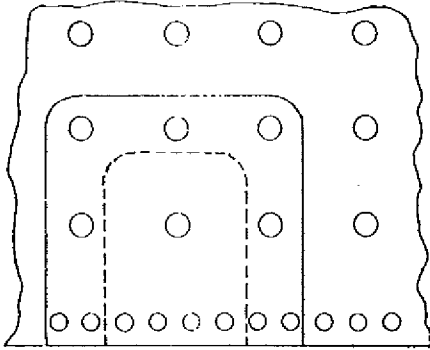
FLUSH OR BUTT-WELDED PATCHES
